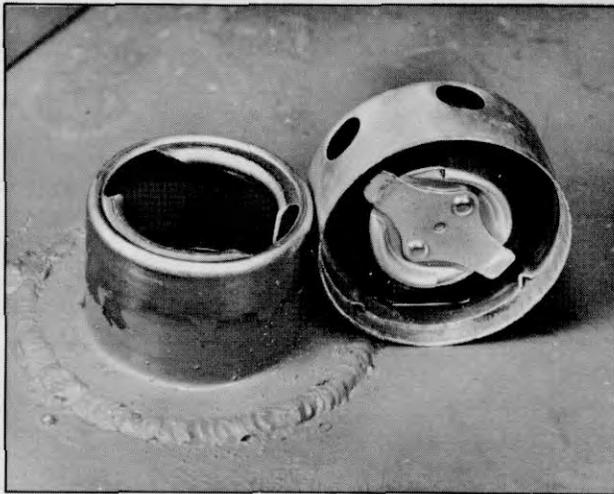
Typical Hydraulic Sump Tank and Sump Breather
